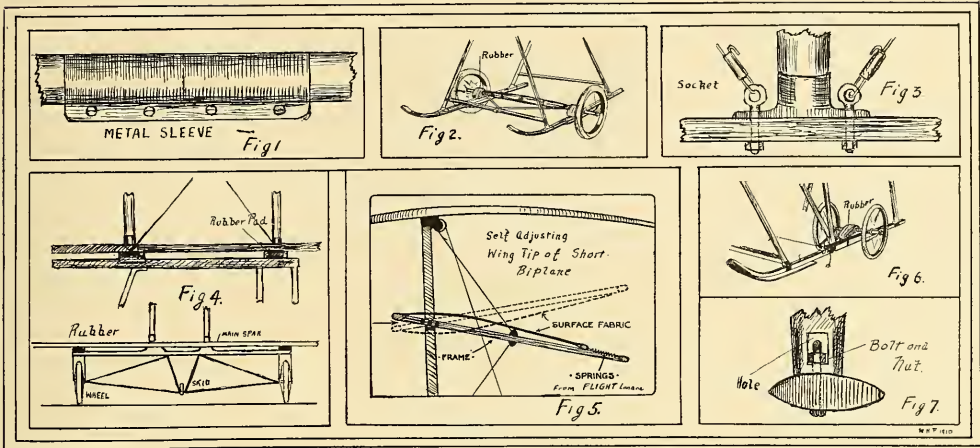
A joint used on the Brauner biplane now at Minicola. It consists of a strip of sheet steel bolted as shown to form a sleeve joint.
